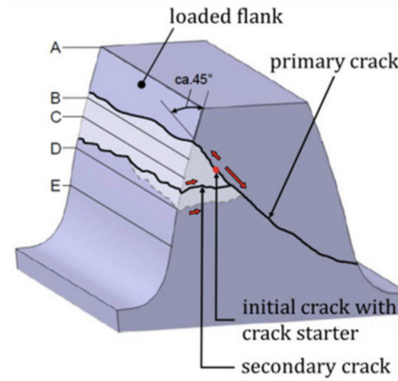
Tooth flank fracture (Boiadjiev et al., 2014)
